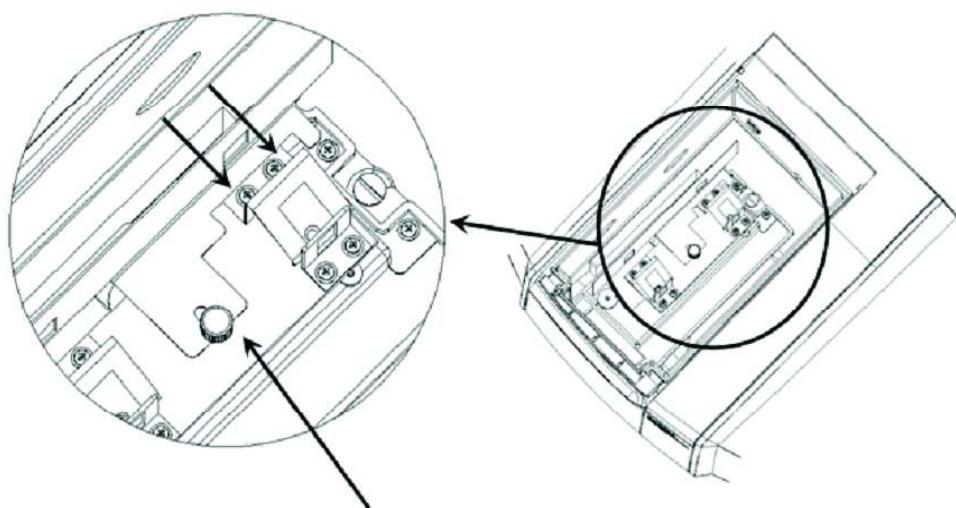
Mounting the Partition Plate onto the Rotary Film Holder
